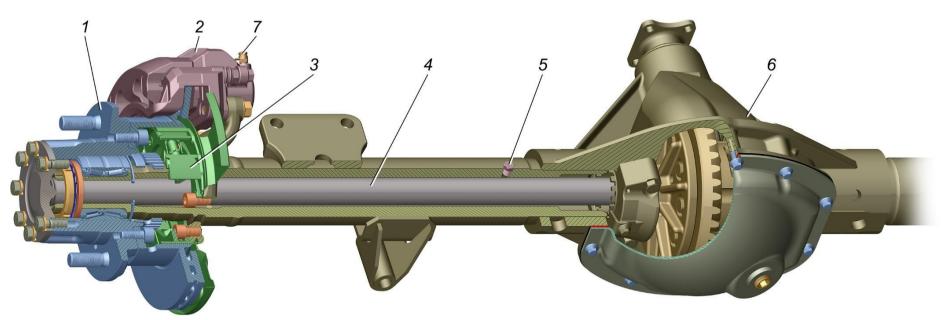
Rear axle: 1 - rear axle hub with brake disk and bearing; 2 - left disk brake; 3 - left parking brake; 4 - rear axle shaft; 5 - breather; 6 - rear axle reduction gear with axle casings; 7 - bleeding valve.
